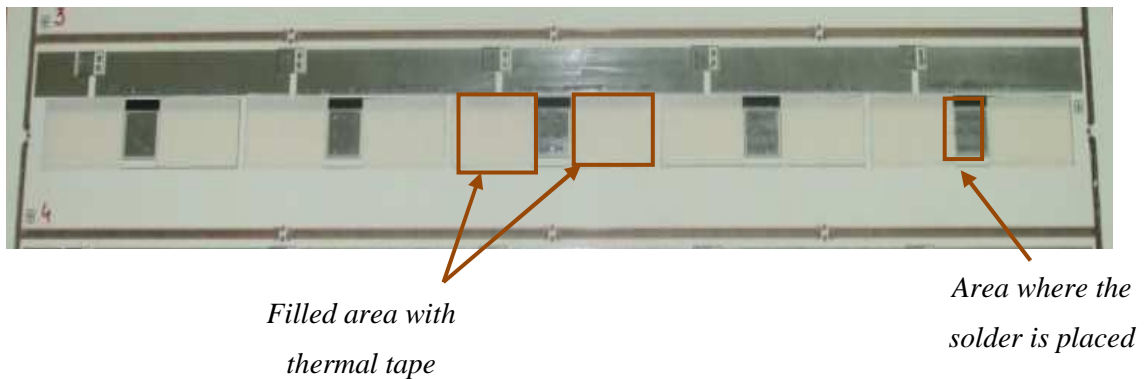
Position where the thermal tape and the solder is placed on the PCB
